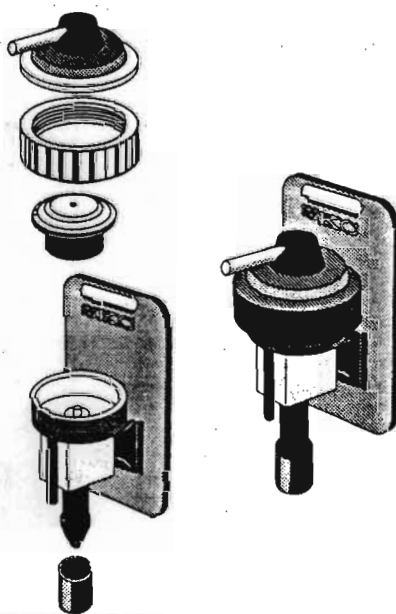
The SKC cyclone dust sampler for respirable dust in exploded view
